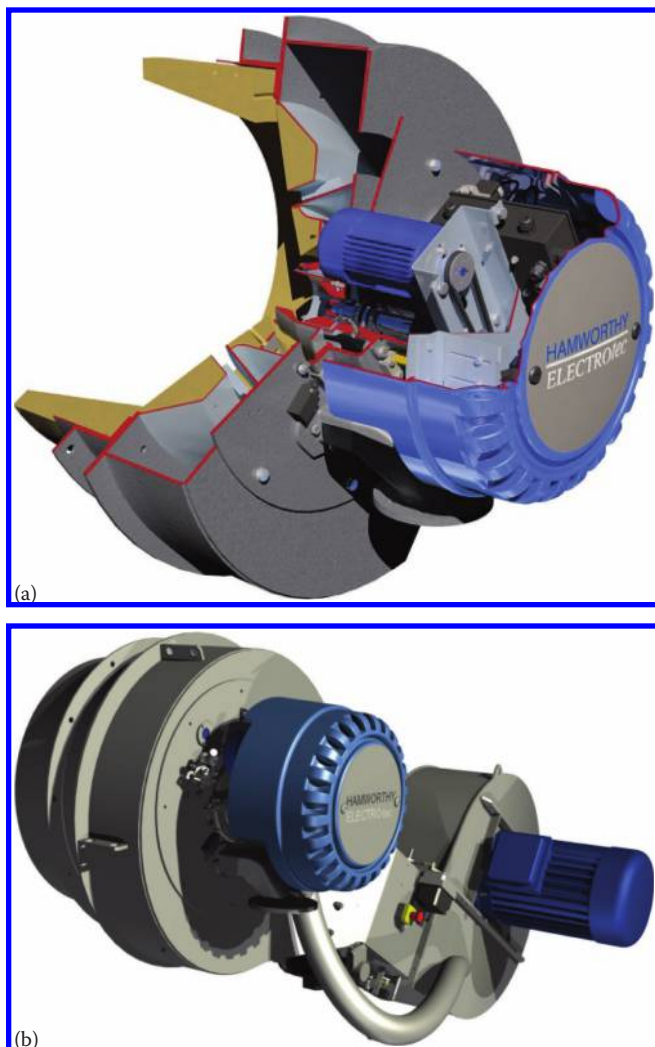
Hamworthy Combustion ElectroTec[®] rotary-cup burner. (a) Burner machine sectional view and (b) complete assembly with FD fan.
